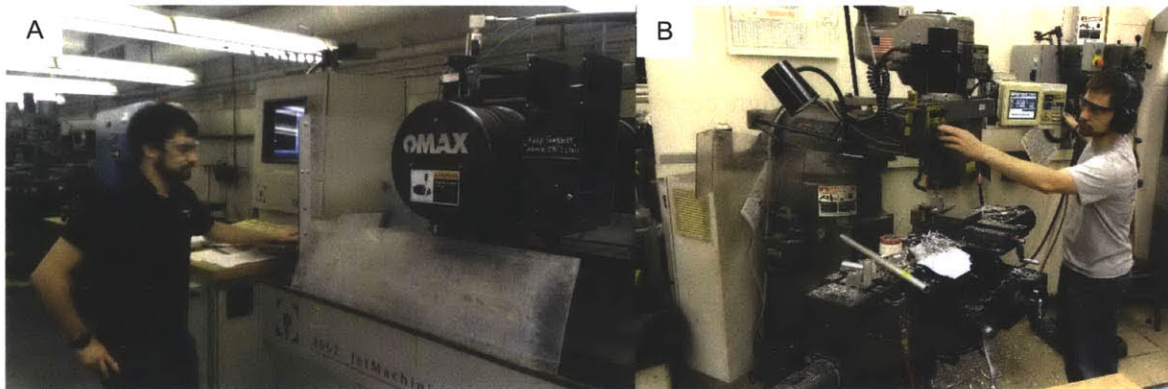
Manufacturing EVA S3 components using a water jet cutter (A) and a CNC mill (B)
